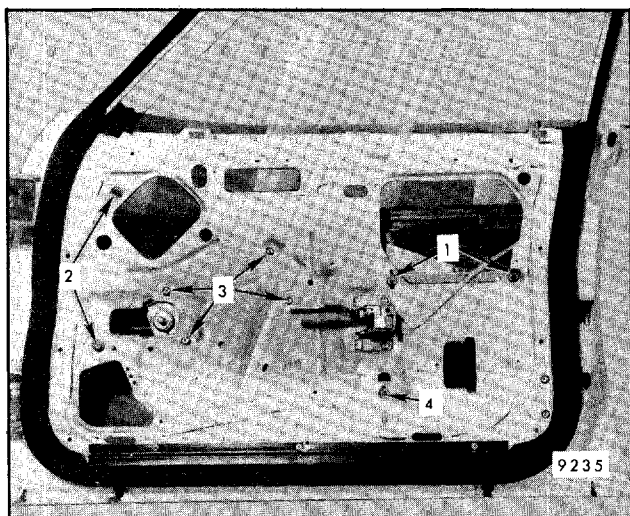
Window Hardware - "B, C" Styles (Sedan Door Shown, Coupe Door Similar)
